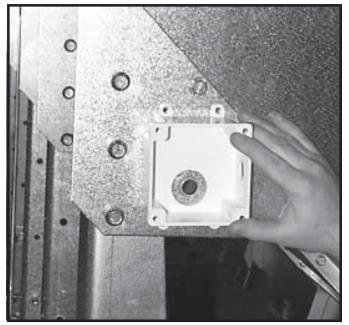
Placement of (4) holes drilled for installation of rear junction box.
